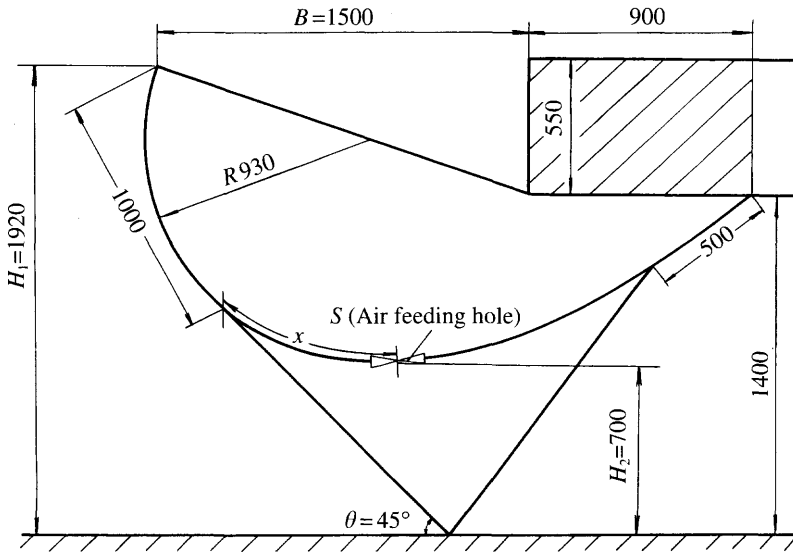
Dimensions of typical bag and finger type skirt on the large skirt test rig.
